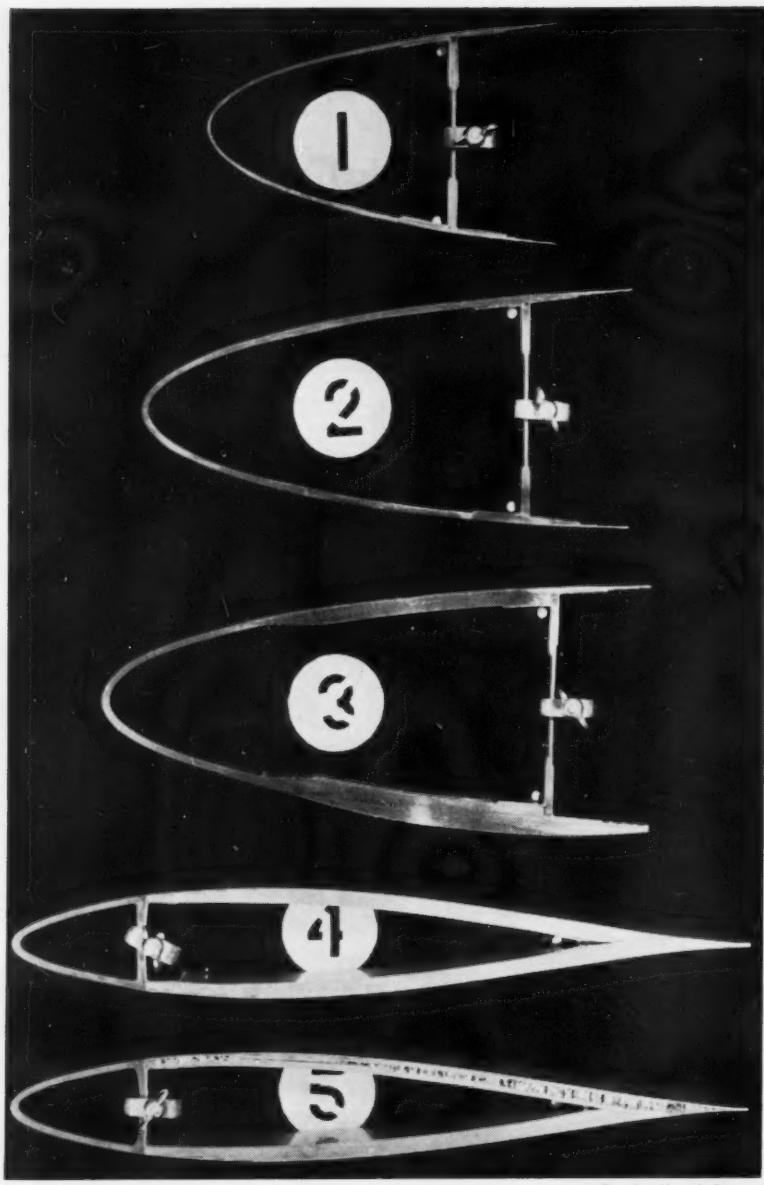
Laminated metal blades which involve metal-to-metal bonding. Bonding is done at elevated temperatures with solid backing on the outside and pressurized fluid in the inside. (1) Tip section of blade with 28-inch chord and 37-foot length; (2) a mid section; (3) and (4) root sections; (5) section of a blade 12 inches from root.
